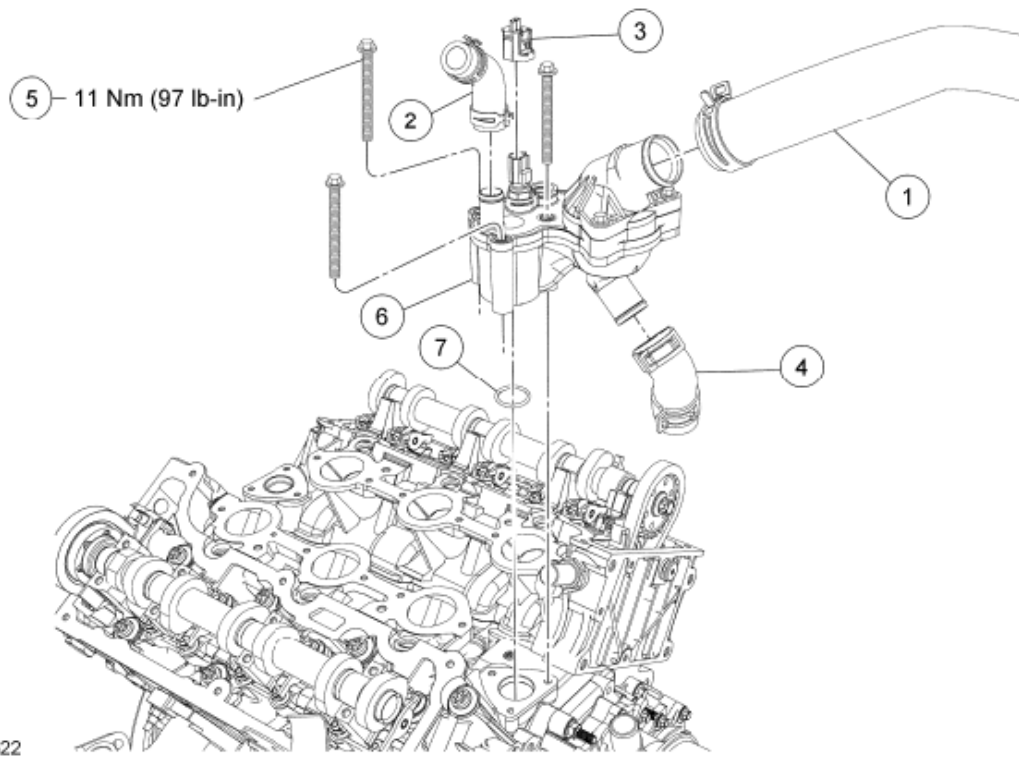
Identifying Thermostat Housing Components With Torque Specifications
